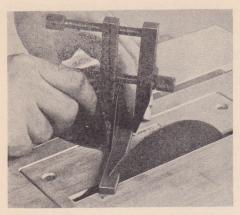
Saw table fitted with Bakelite Bonded Wheel, cutting tempered tool steel
